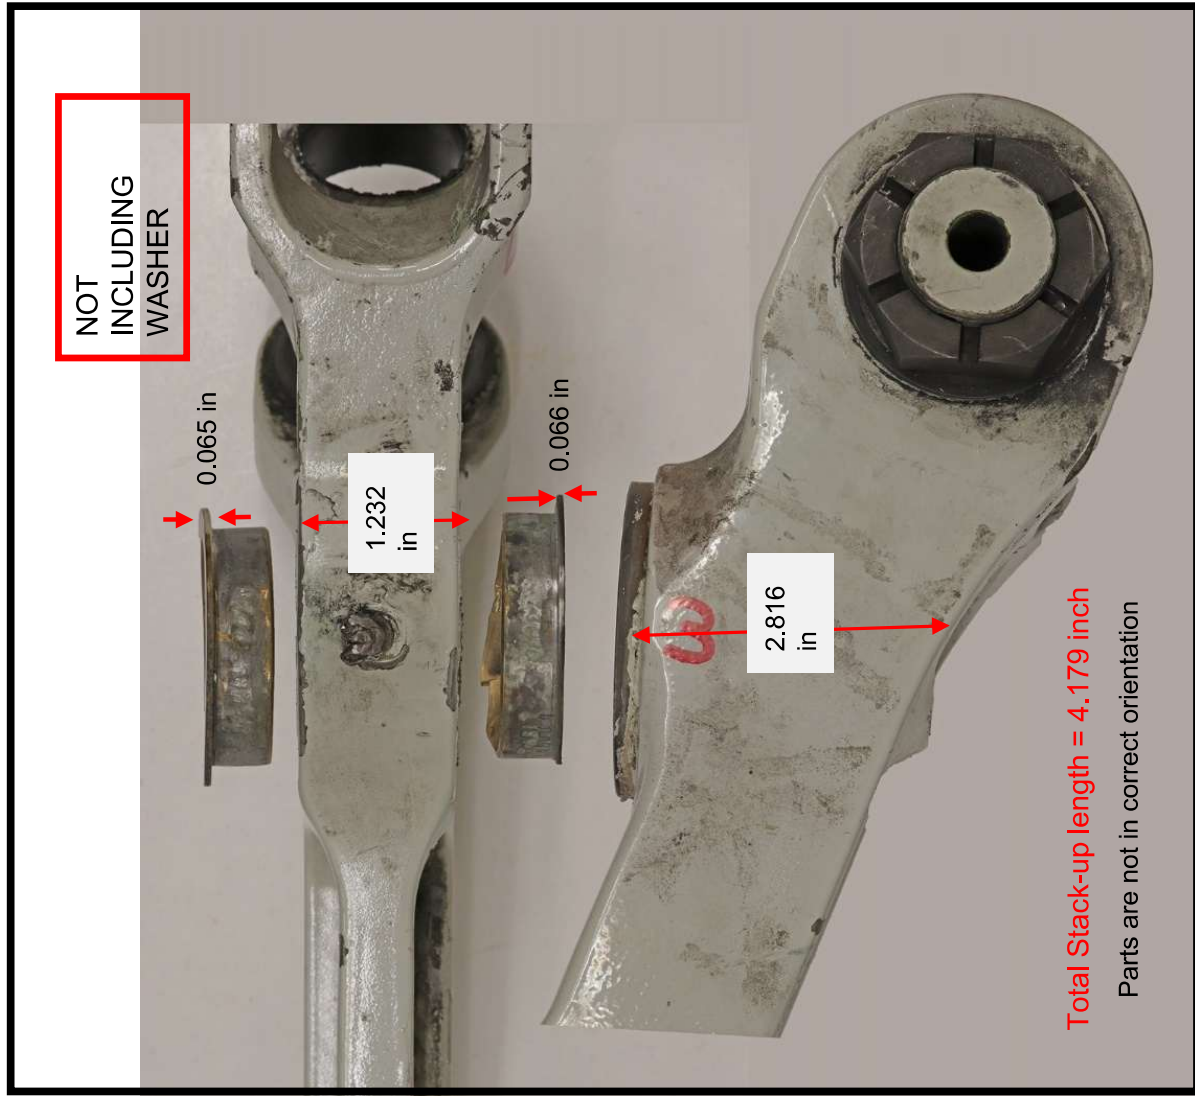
Detailed view of Tee Bolt/Component Stack-up – Dimensions.
